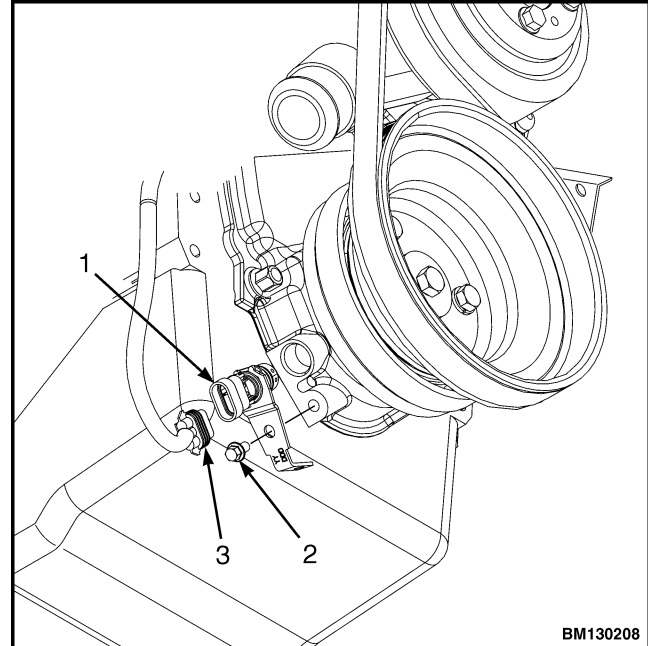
Crankshaft Position (CKP) Sensor Mounting Bolt
